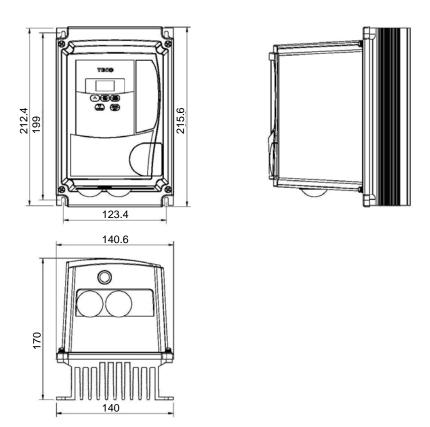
EV drive IP65 (no switch) Frame 1 dimensions
